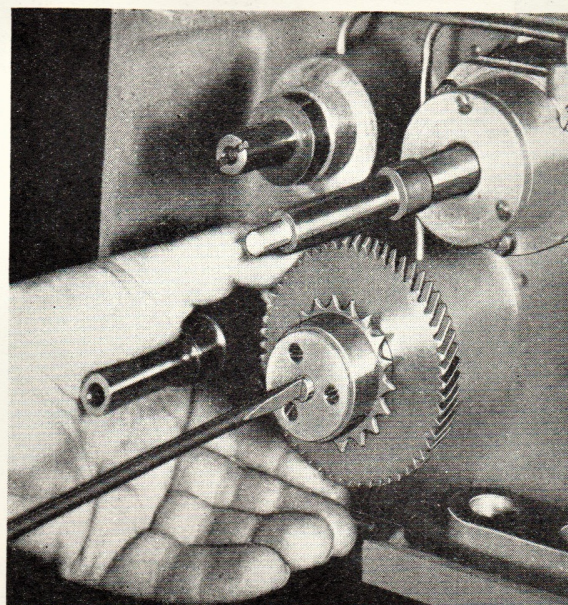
REMOVING END-SCREW SECURING HOLDBACK SPROCKET GEARING TO SHAFT
